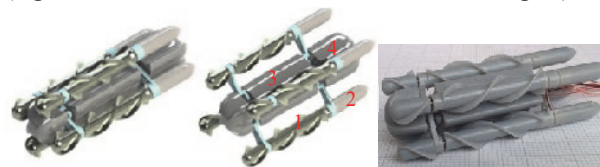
Device concept CAD model shown in closed position (left) and open position (center), and assembled rapid prototyped device (right). 1: arm mounted screw section, 2: screw motor housing, 3: central chassis containing arm actuation motor and gears, 4: control electronics capsule.
